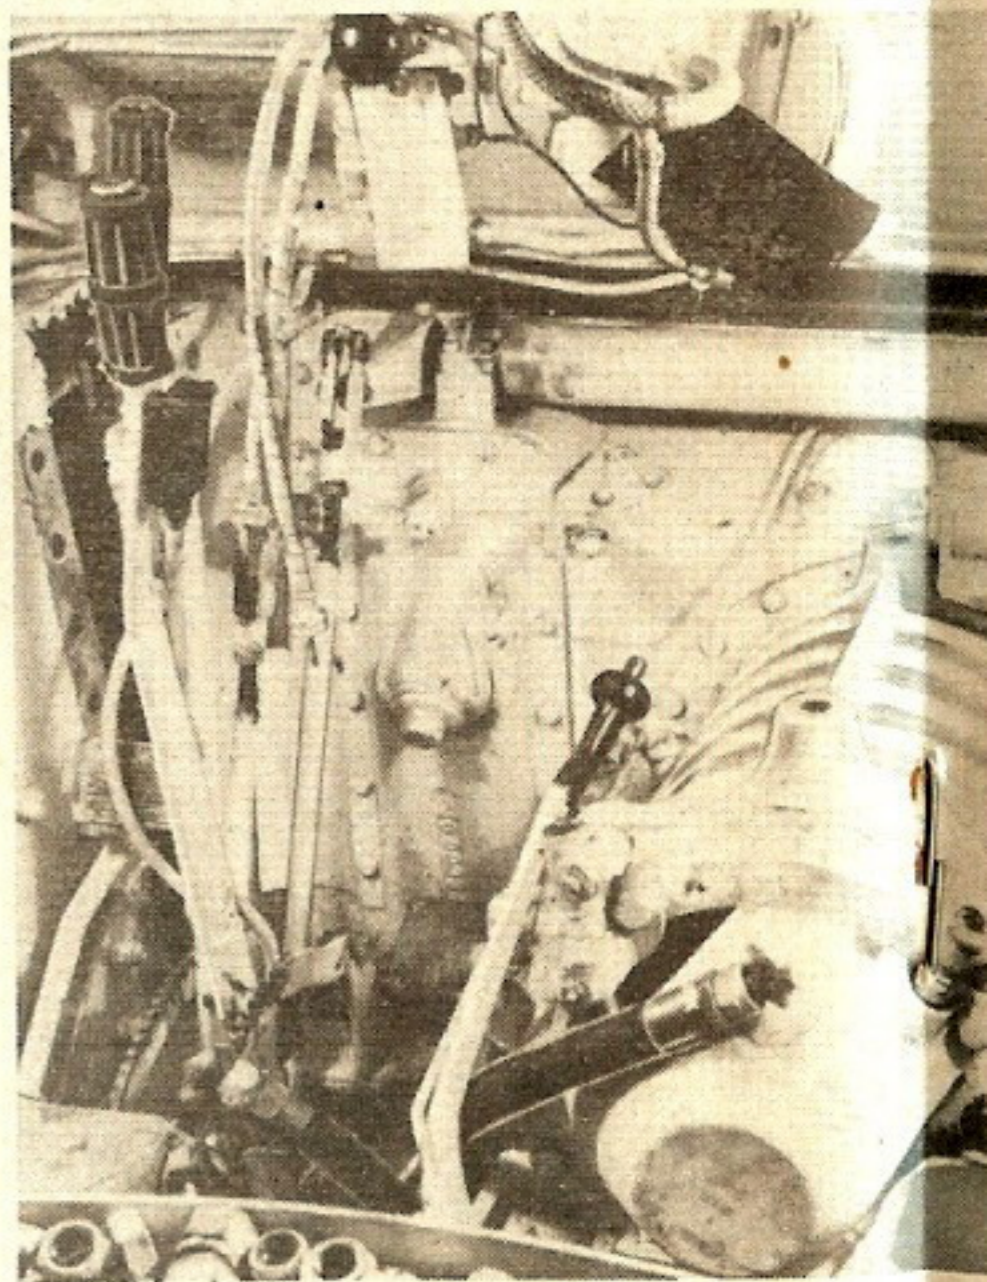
Working in the driver's compartment, remove the oil lines; the oil lines running to the oil cooler; untie the companion flange on the propeller shaft; remove the throttle line. Take the sprocket out of the transmission. On some M1's, the sprocket is mounted just ahead of the transmission on the transmission case breather. You'll have to remove it, depending on your vehicle. Just make sure the final
